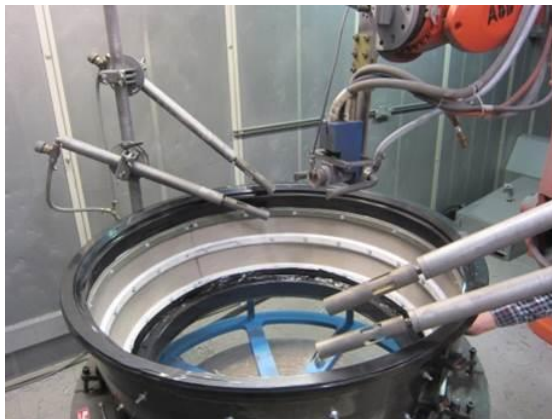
Manufacturing of the composite booster casing (part 2). Courtesy of Safran Aero Boosters.
